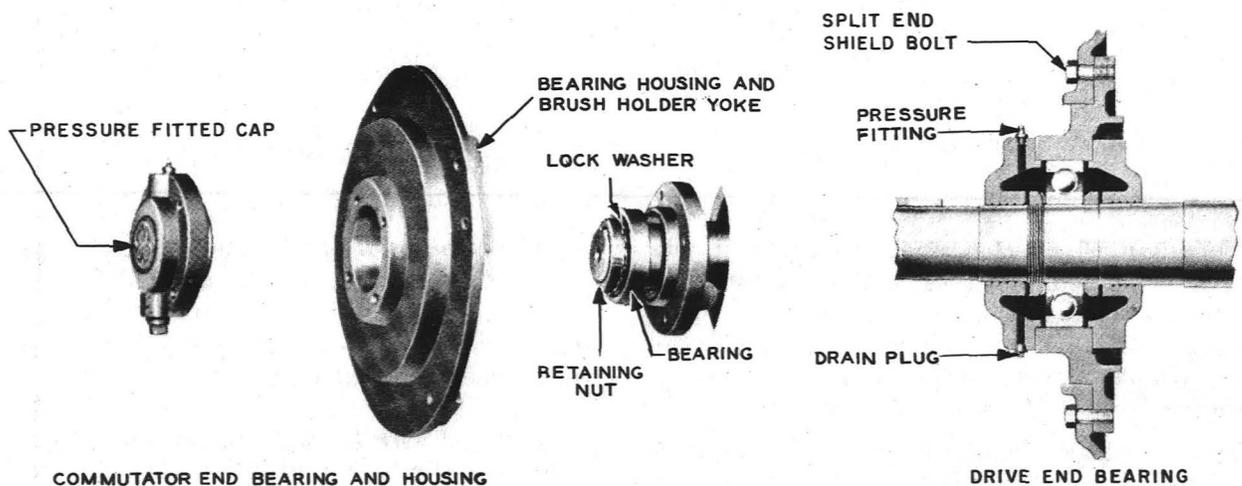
Drive-End Ball Bearing and Housing — Typical of CD-1000 Series
